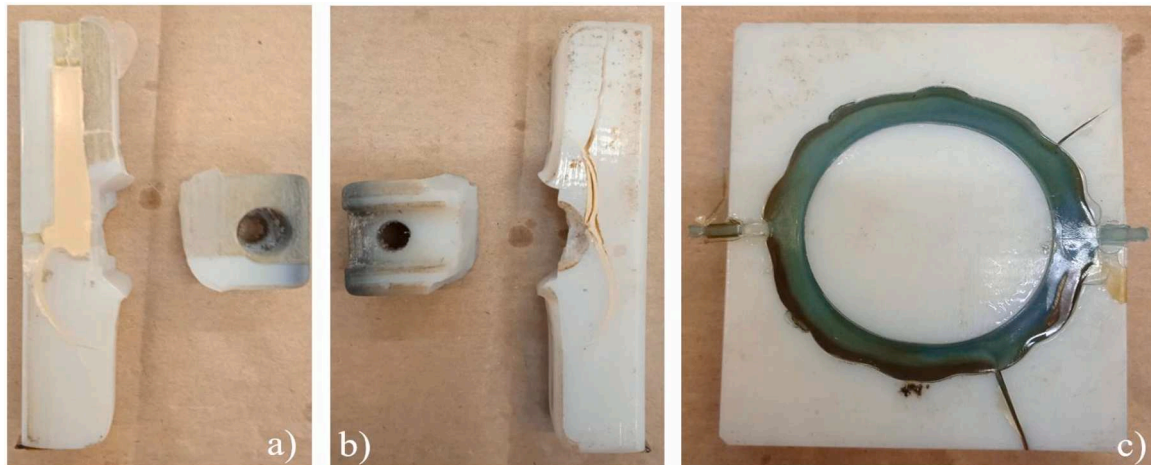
Failed gate insert (a and b) and the failed mould insert c).
